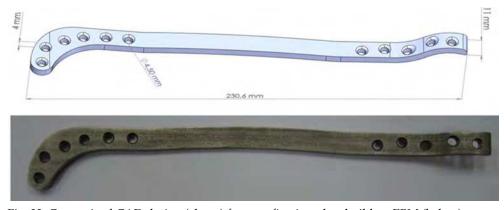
Customized CAD design (above) fracture fixation plate build on EBM (below).
